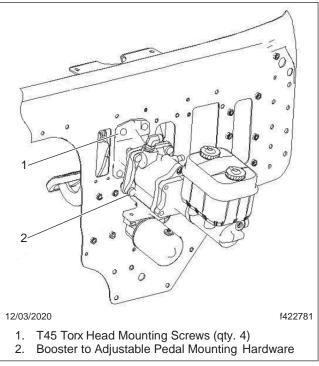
, Attaching the Adaptor Plate to the Firewall.
